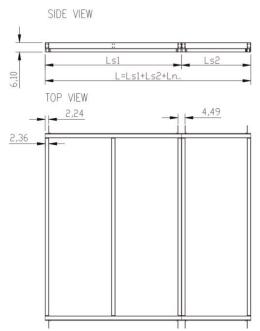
C Detail of the sections connected to the rails, where the lifting lugs are connected.
